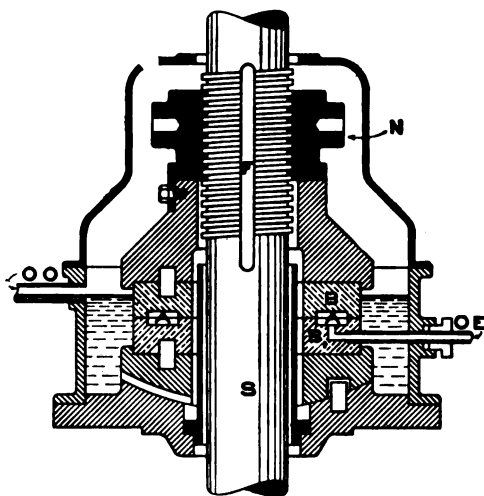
Vertical Suspension Oil Pressure Bearing.
